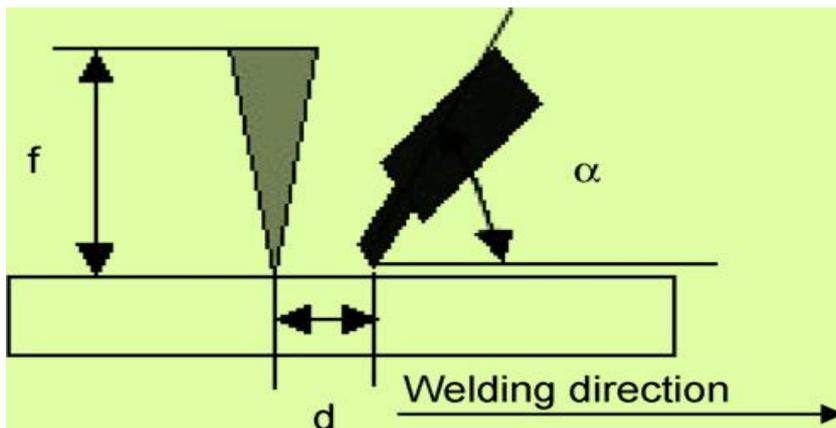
The laser focal distance (f) from the piece surface and the torch angle (α) of LASER-MIG set-up for hybrid welding (G Casalino).
